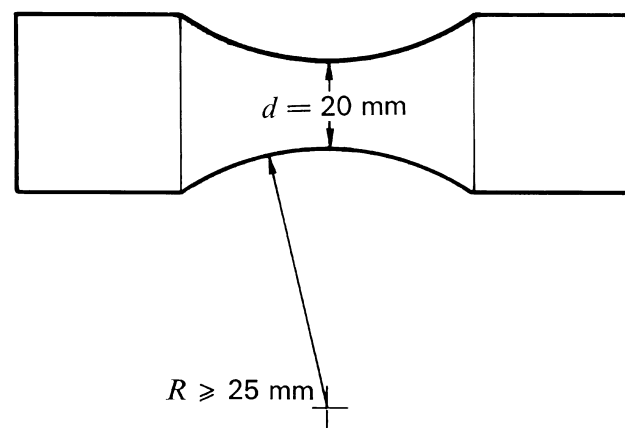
Test specimen dimensions for grey iron castings - I
